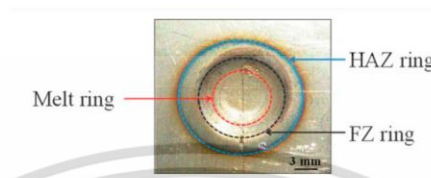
Appearance of the SUS316L/SUS425 resistance spot welded joint.
